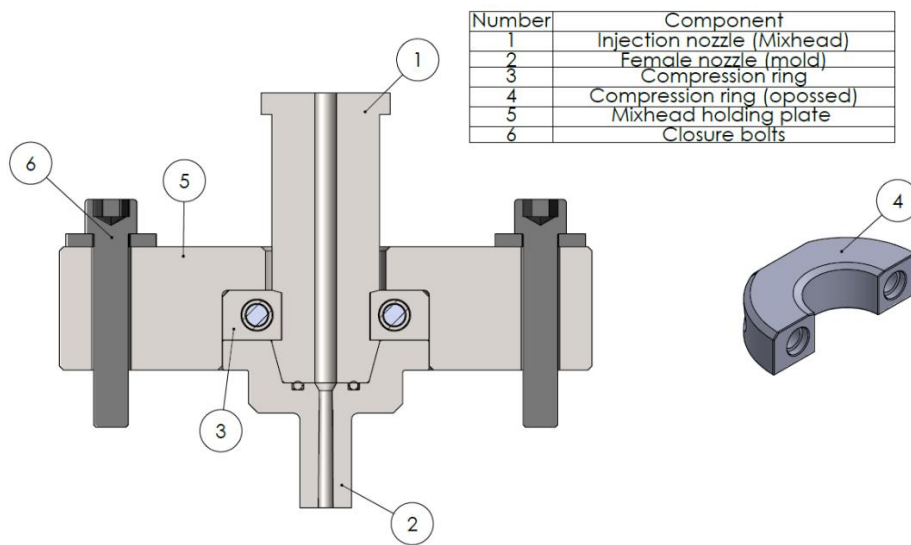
Detail of mixhead attaching mechanism into the mold.
